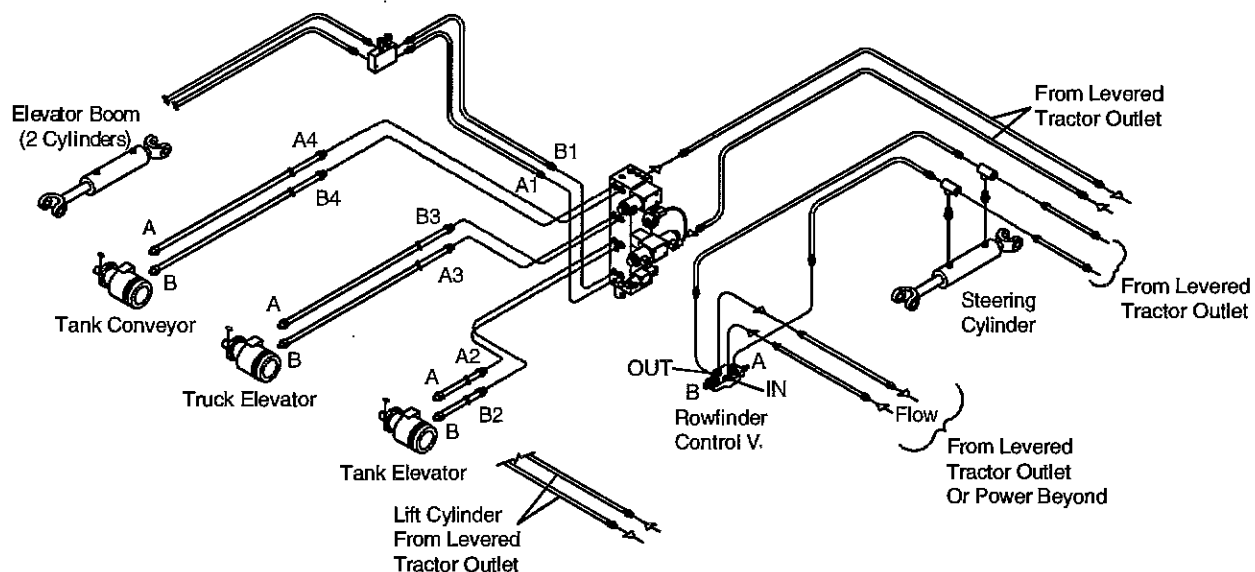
Hydraulic System for Harvester with Fixed Carrier Wheels
